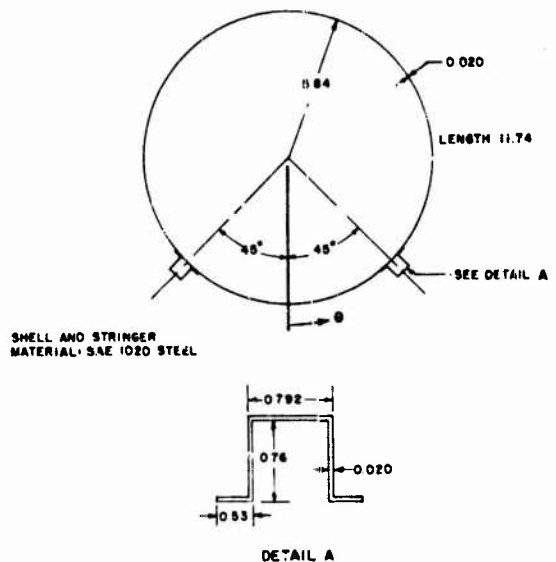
Geometry of stringer stiffened shell. All dimensions in inches except as noted
